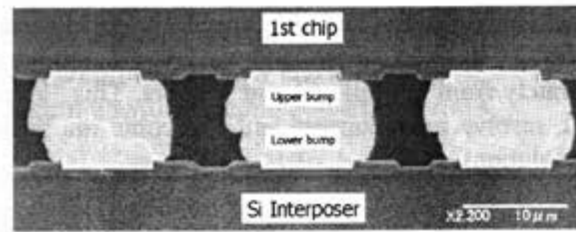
Microjoint of 3D stacked LSI using UFB.
